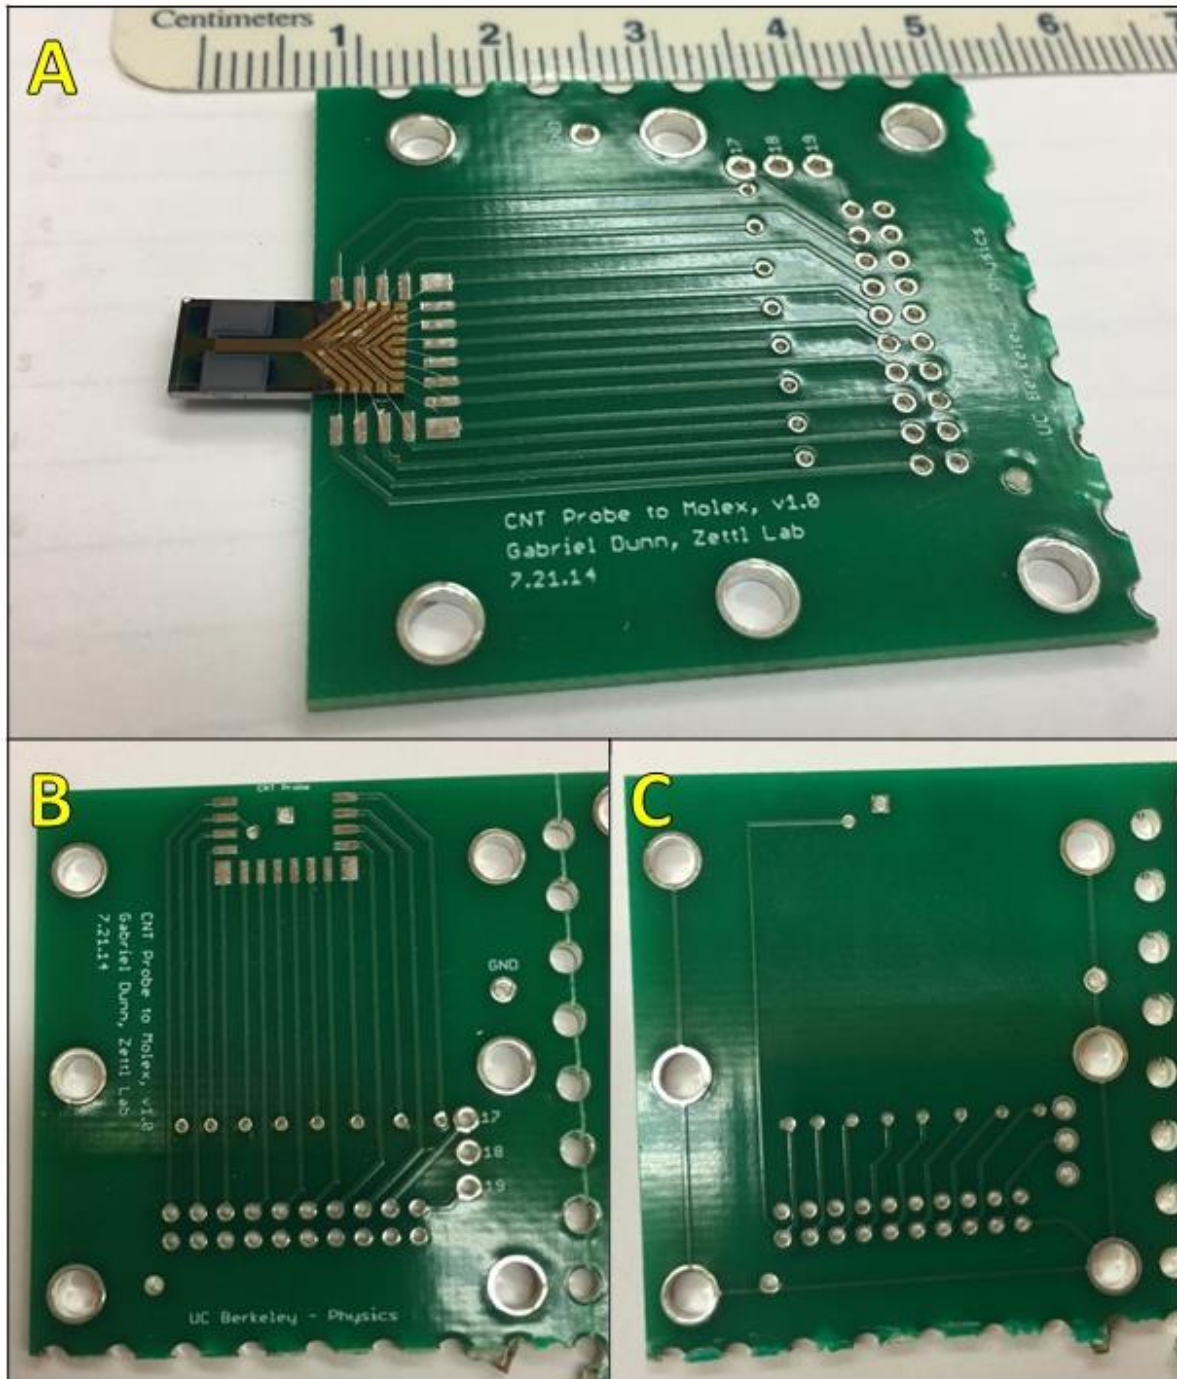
Printed Circuit Boards (PCBs). A) Optical image of chip wire bonded to PCB. Chip is left overhanging and screw holes mount to a nanomanipulator stage for cell interrogation. B) PCB wiring, front-side. C) PCB wiring, back-side. 20 pins are made to accommodate a Molex™ interconnect system.
